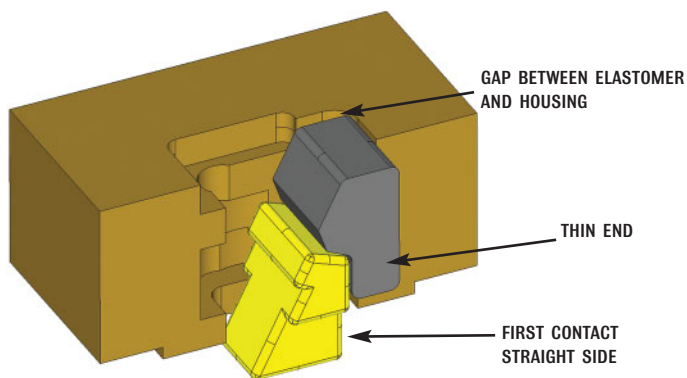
THE ELASTOMER IS BETWEEN THE CONTACT AND HOUSING, FLUSH WITH THE HOUSING.
